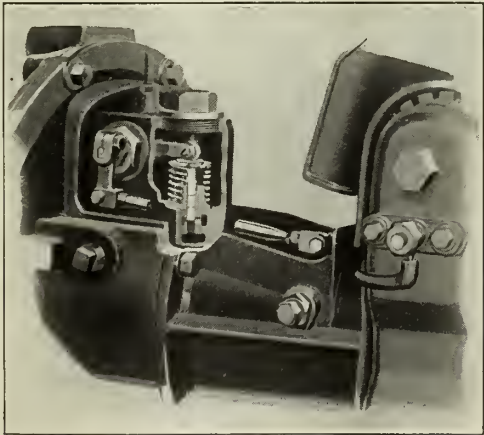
American Electric Headlight, Model D, Sectional View to Show Valve.
